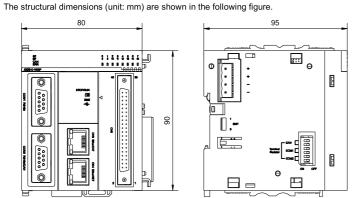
AX7 □-C-1608P CPU module dimensions
